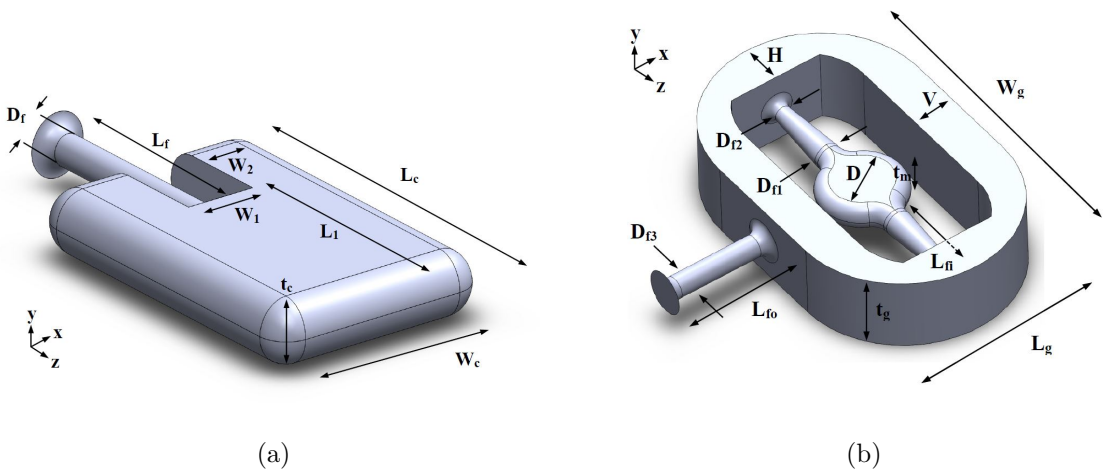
Drawings of the micro-scanners parametrically showing their dimensions.
